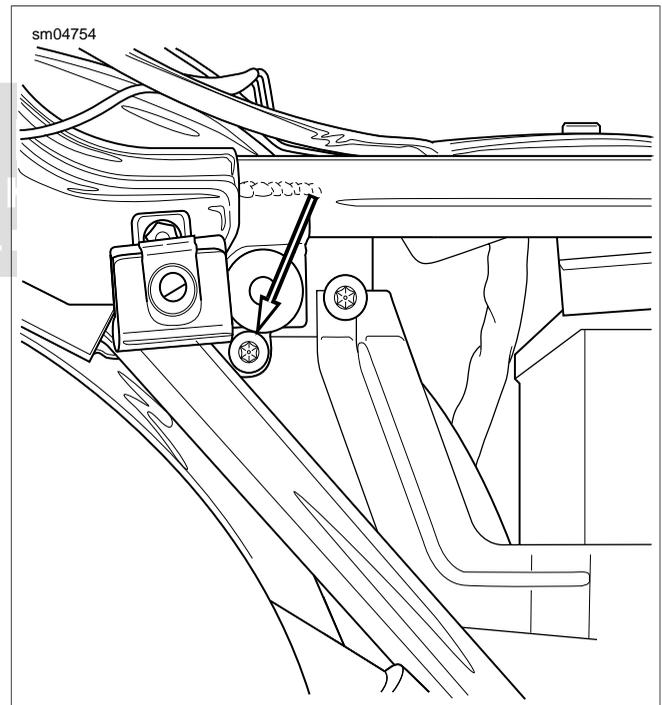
Rear Fender Side Mounting Screw (Right Side)
